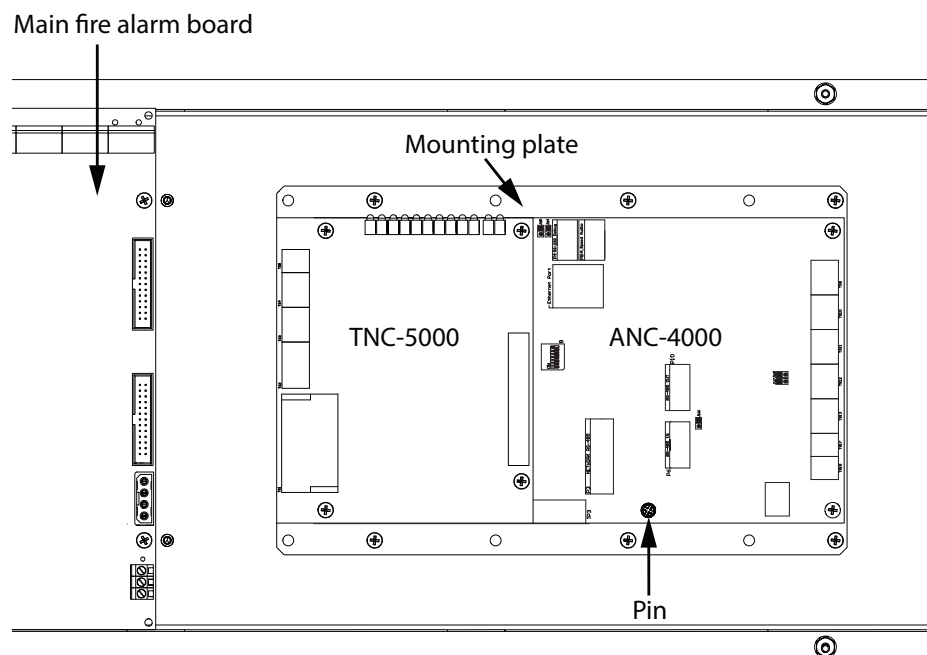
Final Position of ANC-4000, TNC-5000, Mounting Plate
